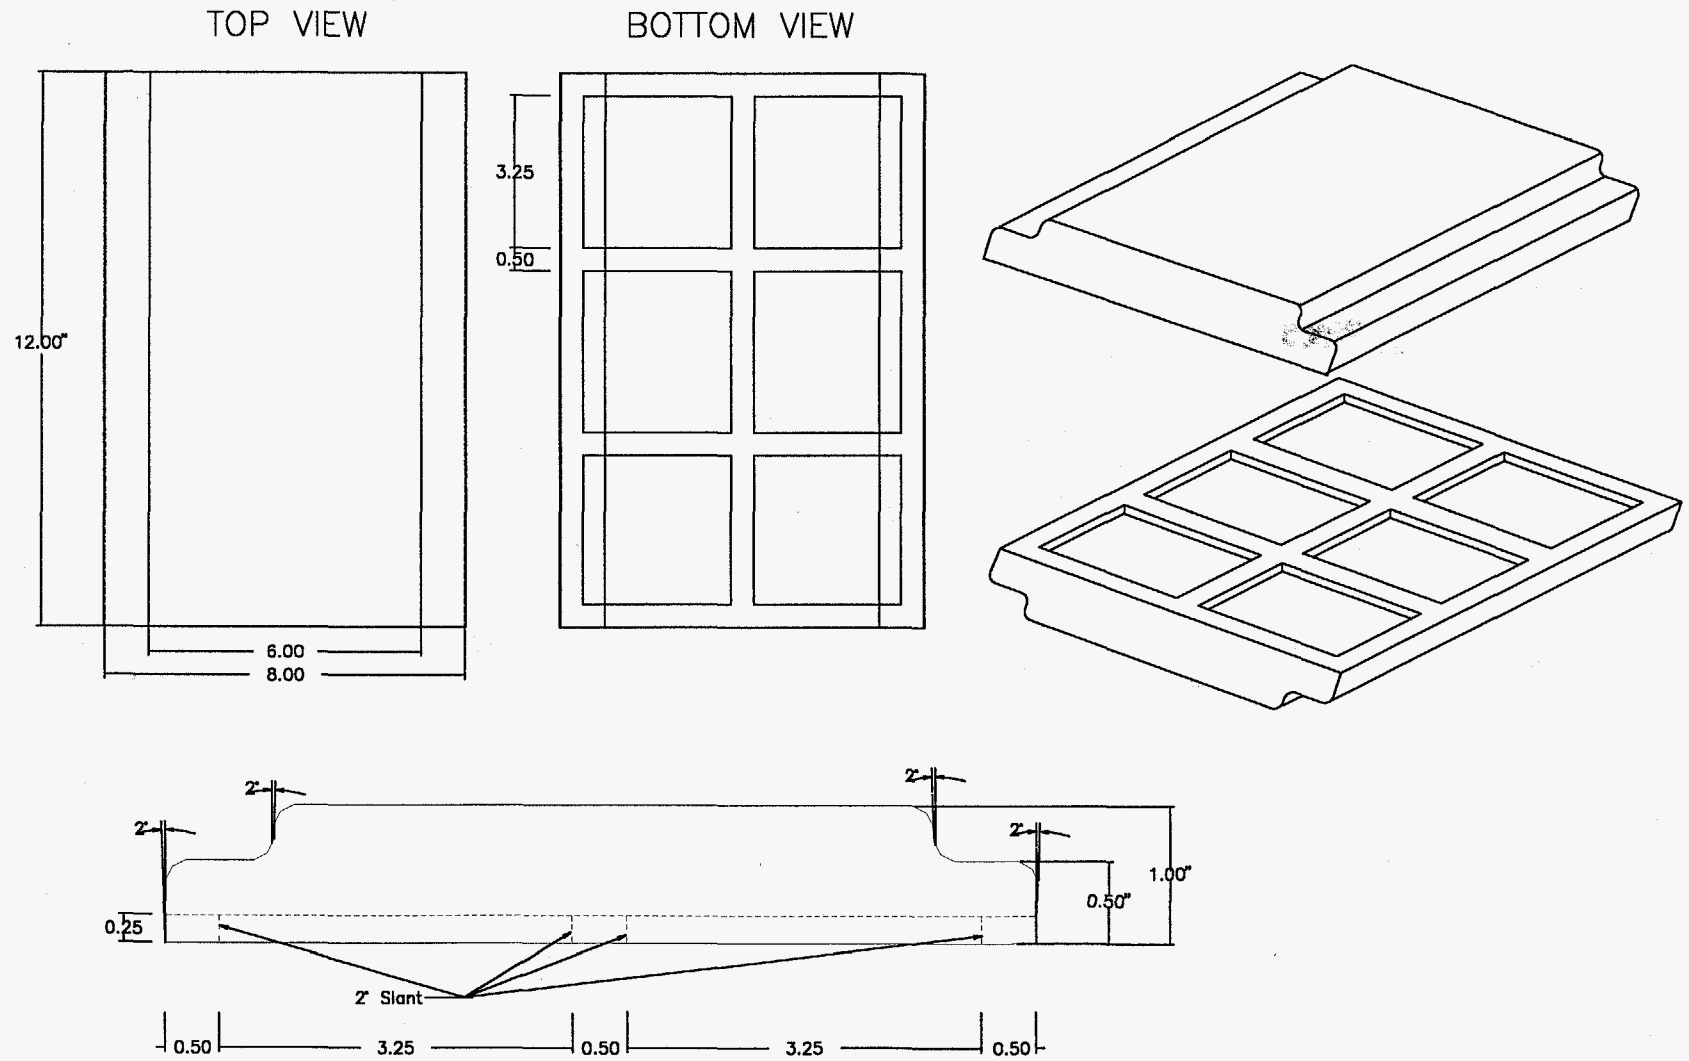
Proposed Ribbed Plate Casting for Machinability Project.
